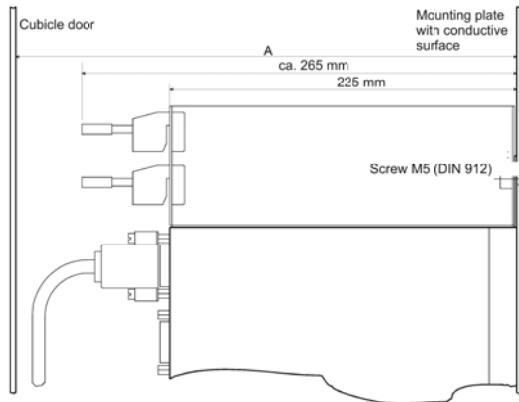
Mounting dimensions cabinet, depth [mm]
